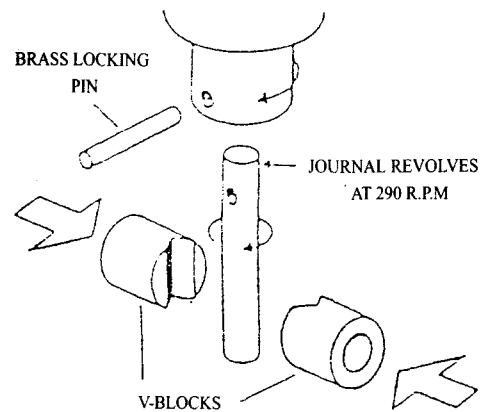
Exploded View of V-Block and Journal Arrangement.
